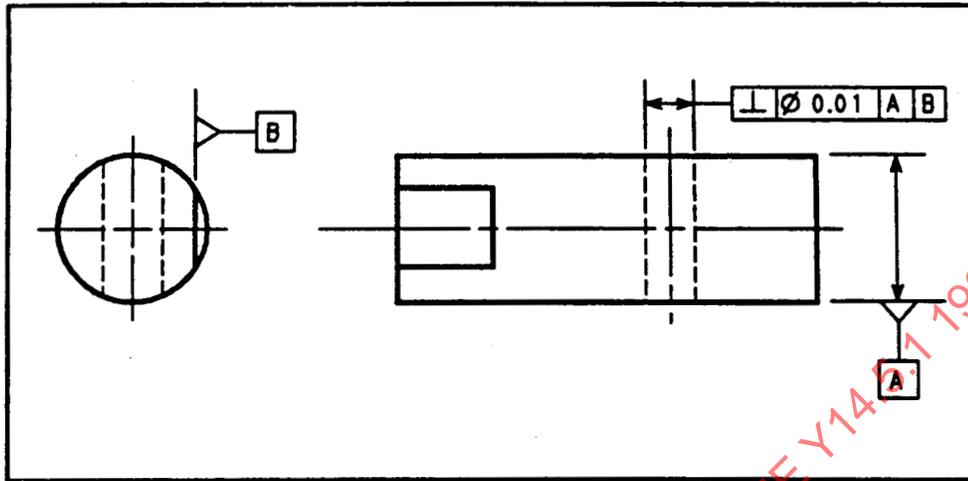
CYLINDRICAL PERPENDICULARITY OF AN AXIS; PRIMARY DATUM AXIS; AND SECONDARY DATA PLANE
